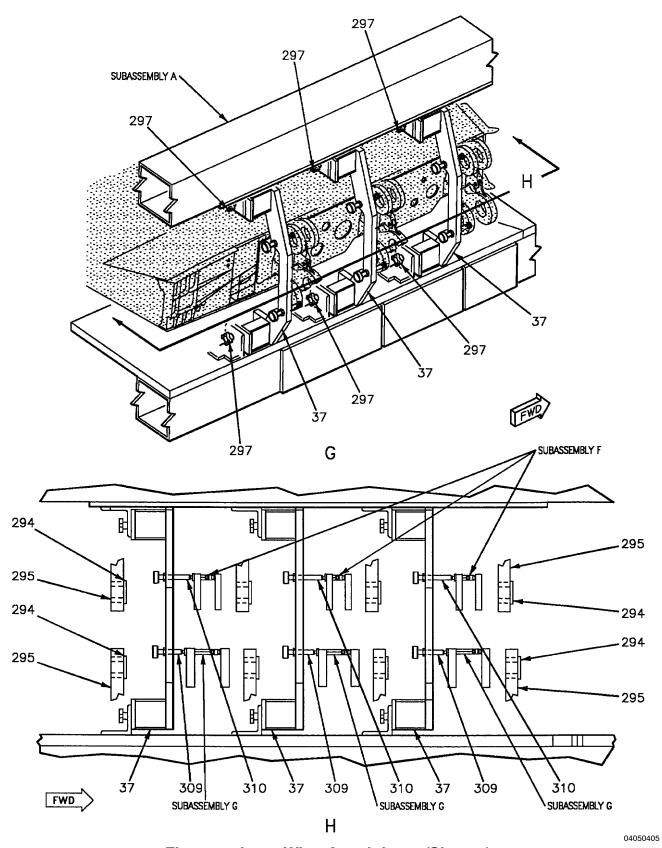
Inner Wing Attach Lugs (Sheet 5)
